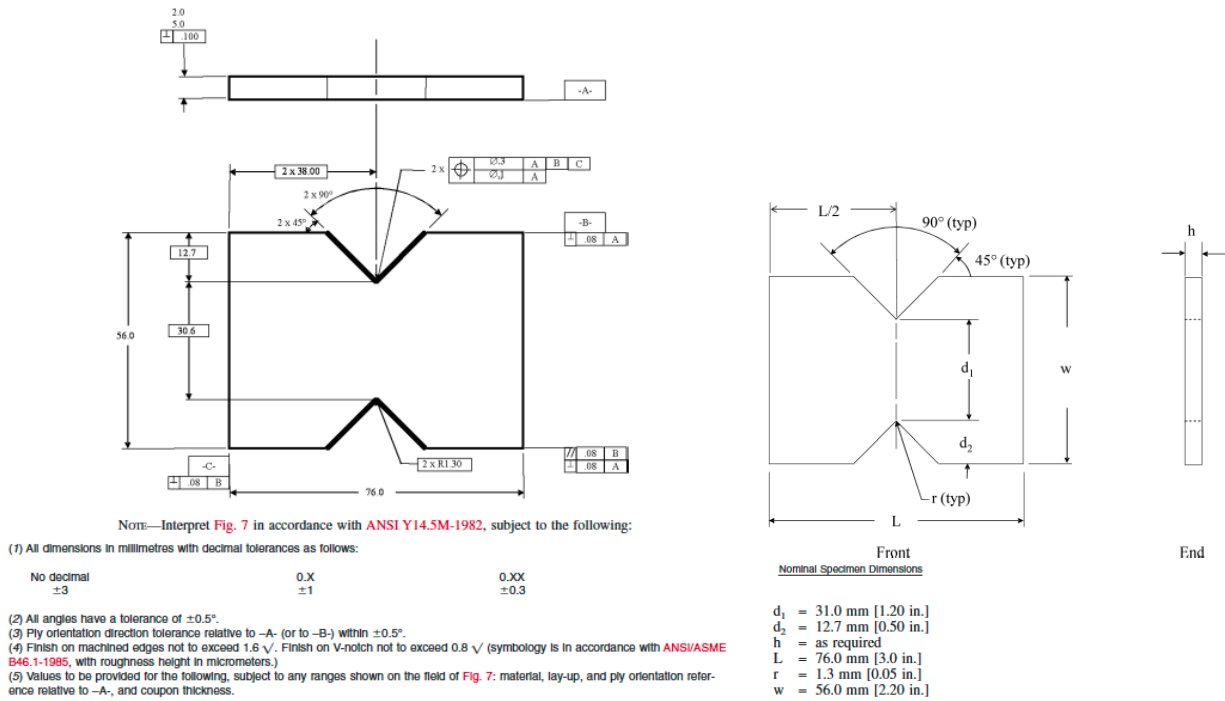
ASTM-D-7078 V-Notch Rail Shear Specimen Dimensions and Nomenclature.
